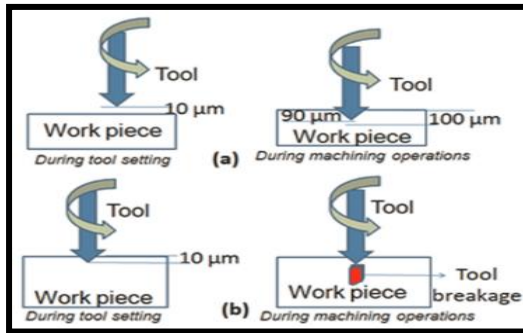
Contact of workpiece and tool during tool setting a) gap between tool and workpiece is 10  $\mu\text{m}$  b) tool goes inside the workpiece by 10  $\mu\text{m}$  (Roy *et al.*, 2016)
